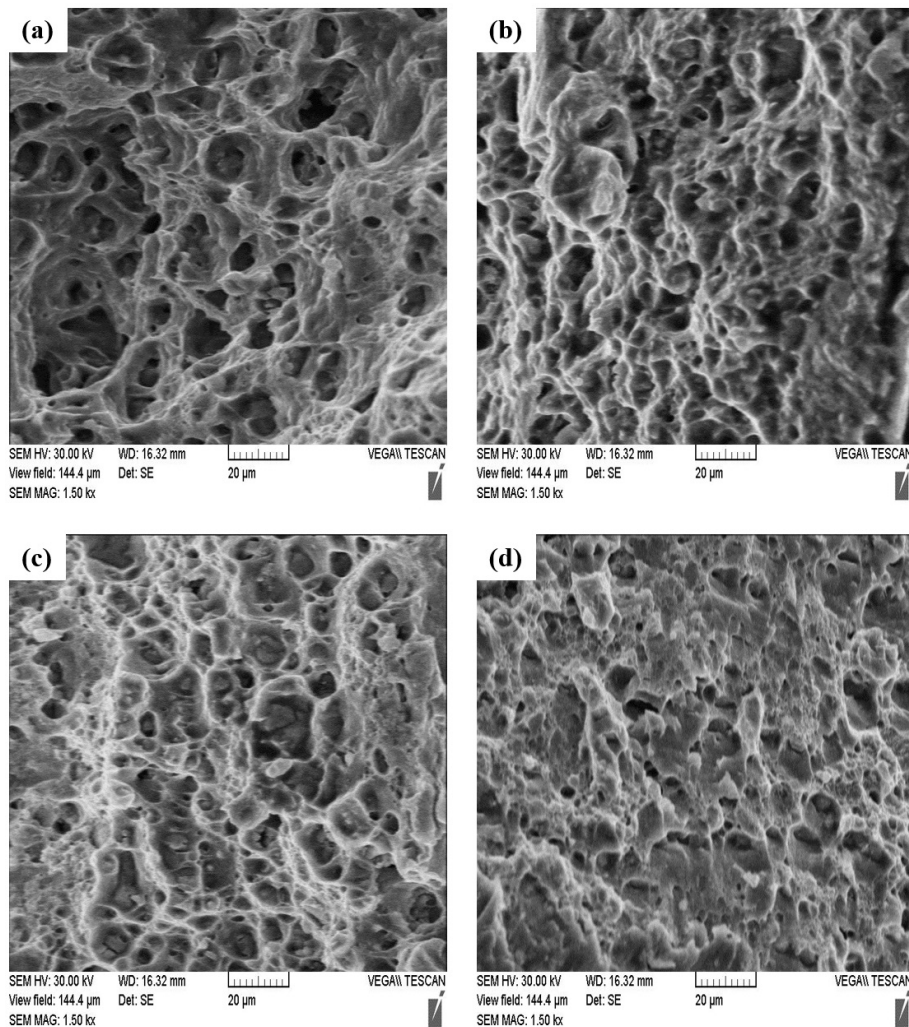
SEM micrographs of the fracture surfaces after tensile test for: (a) annealed AA2024; (b) ARB; (c) ARB + FSW and (d) ARB + FSW + T6 specimens.
